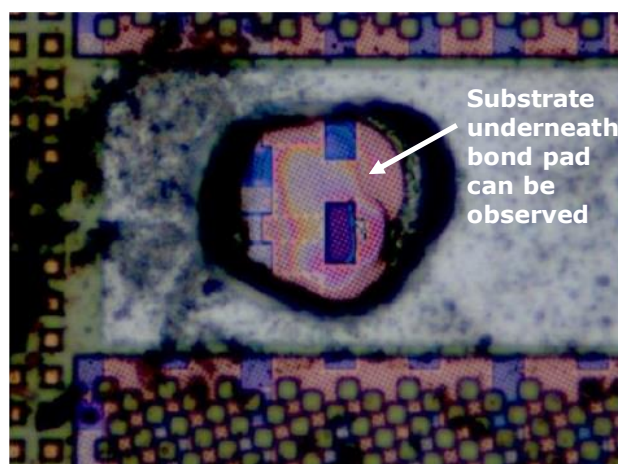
Cratering on bond pad revealing internal circuitry post wire bond shear test.
